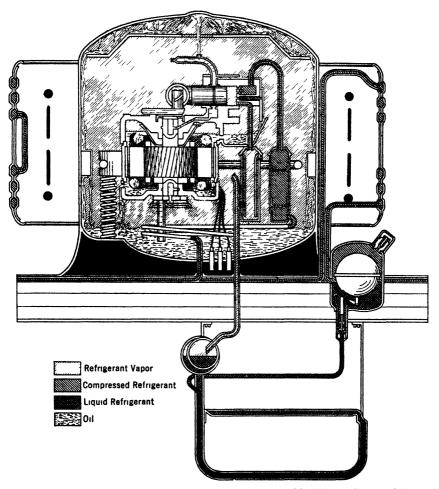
12. The hermetically sealed type of household refrigerating machine.
